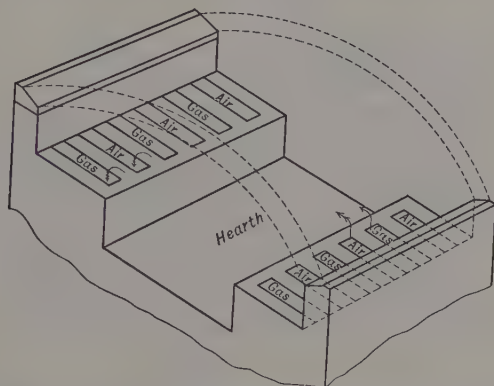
Perspective view of part of skelp heating furnace. Note arrangement of gas and air ports.
